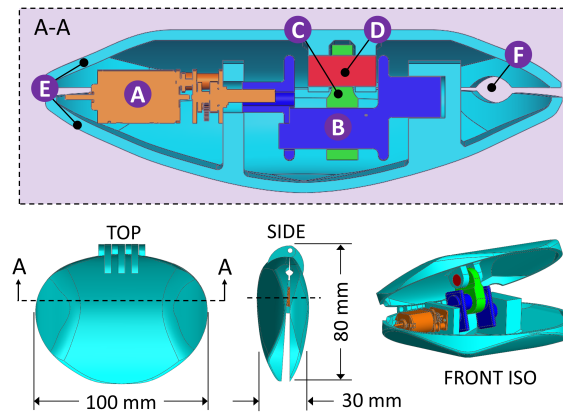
Mechanical overview of RoboScallop prototype. A 3D CAD model of the robot is shown in different views with a cross section through A-A depicting the critical components of the internal mechanism of the robot: A-motor, B-crankshaft, C-connecting arm, D-hinge pin, E-body shells, and F-intake/jet aperture. The front covering membrane is not shown.
